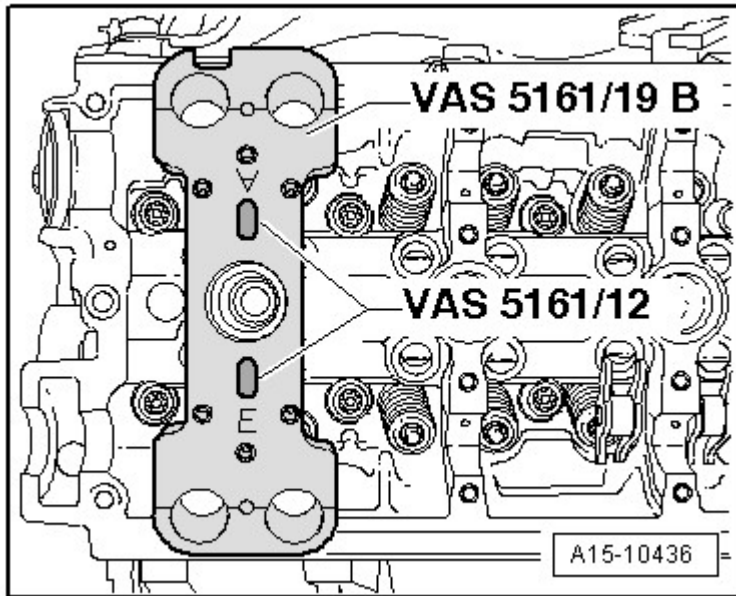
Identifying FSI Engine VAS 5161/19B Guide Plate Tightened On Cylinder Head Using Knurled Bolts VAS 5161/12
